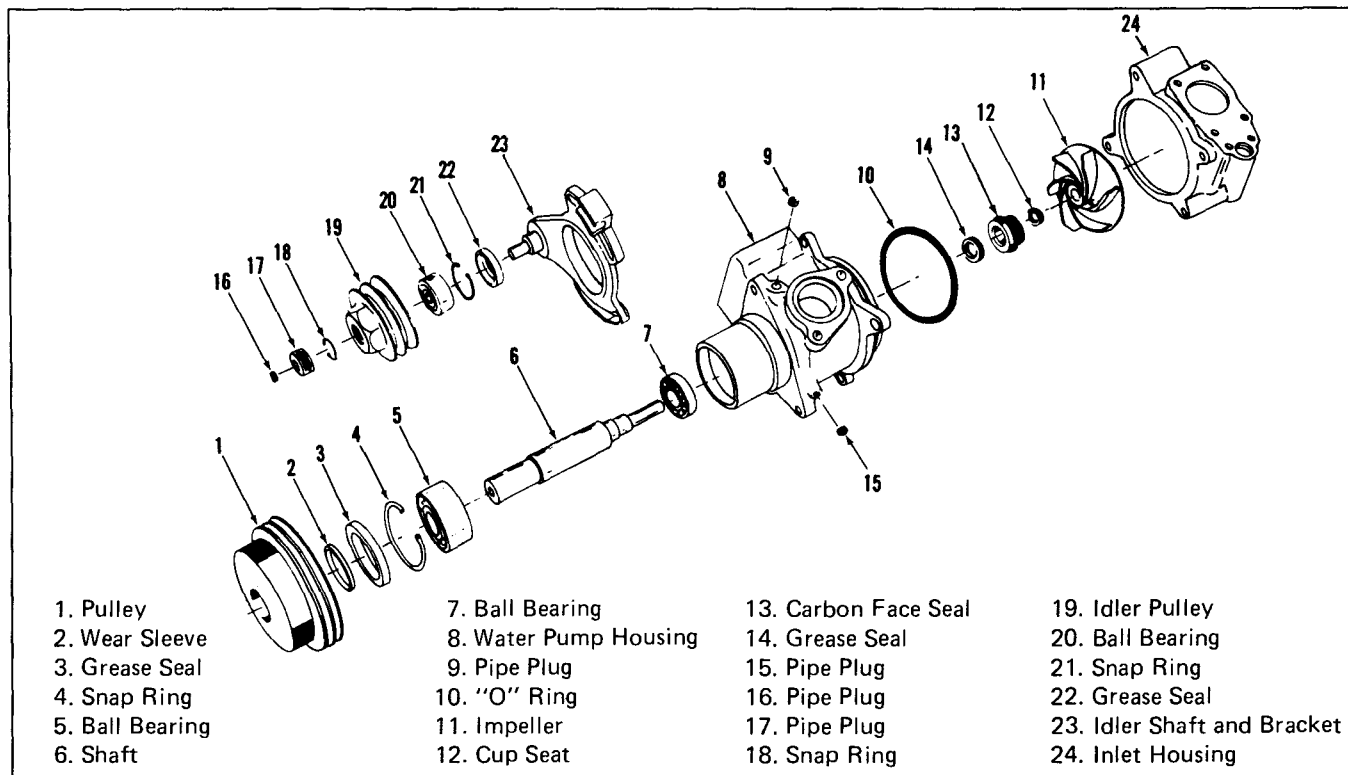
, (N10857). (NTA) Water pump — exploded view
